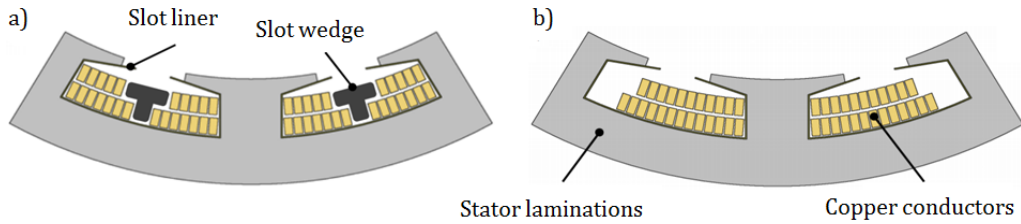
Winding variants, a) Standard winding, b) Slot-wedge winding [59]
